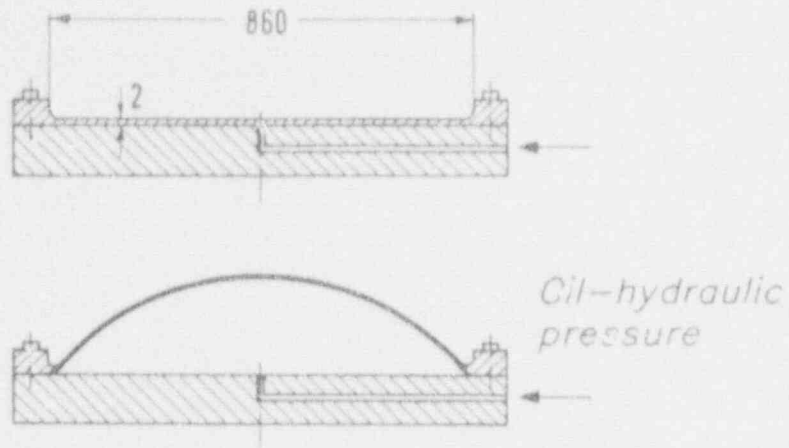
Experimental Set-up for the Membrane Tests (Dimensions in mm)
